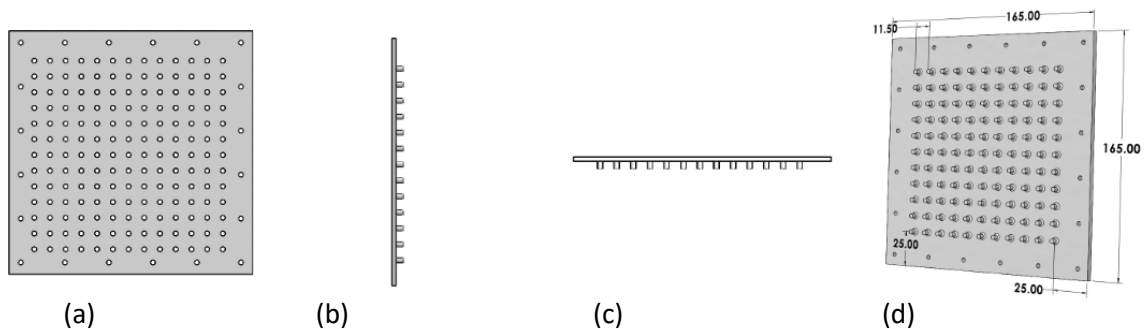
Large scale 3D design of the sensor surface; (a)- Top view of the sensor, (b)- Bottom view, (c)- Side view, (d)- Isometric view with dimensions
